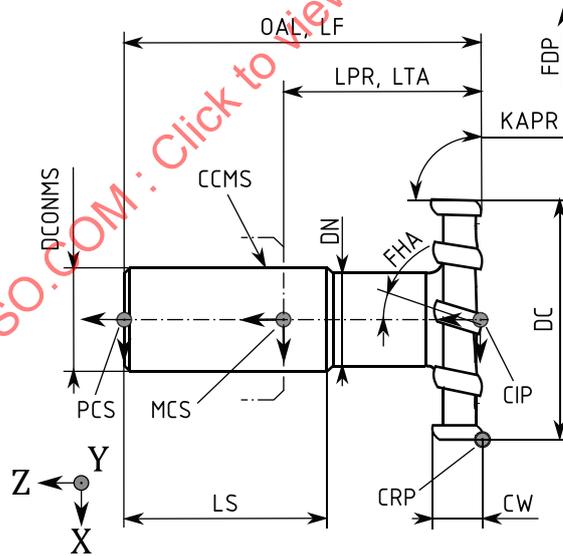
ISYC 303-05 - T-slot end mill, solid
